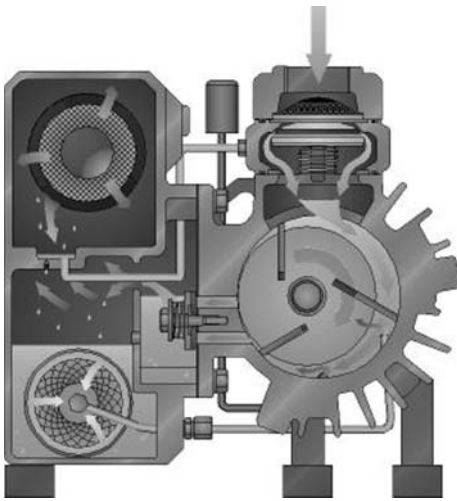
Section through a rotary vane vacuum pump, Dr.-Ing. K. Busch GmbH
